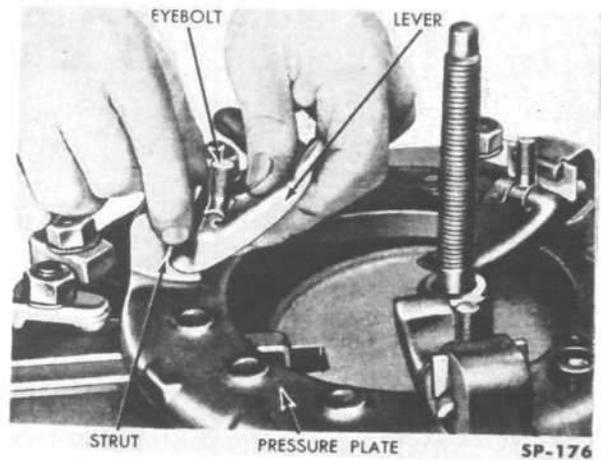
ASSEMBLING LEVERS ON CLUTCH PRESSURE PLATE
